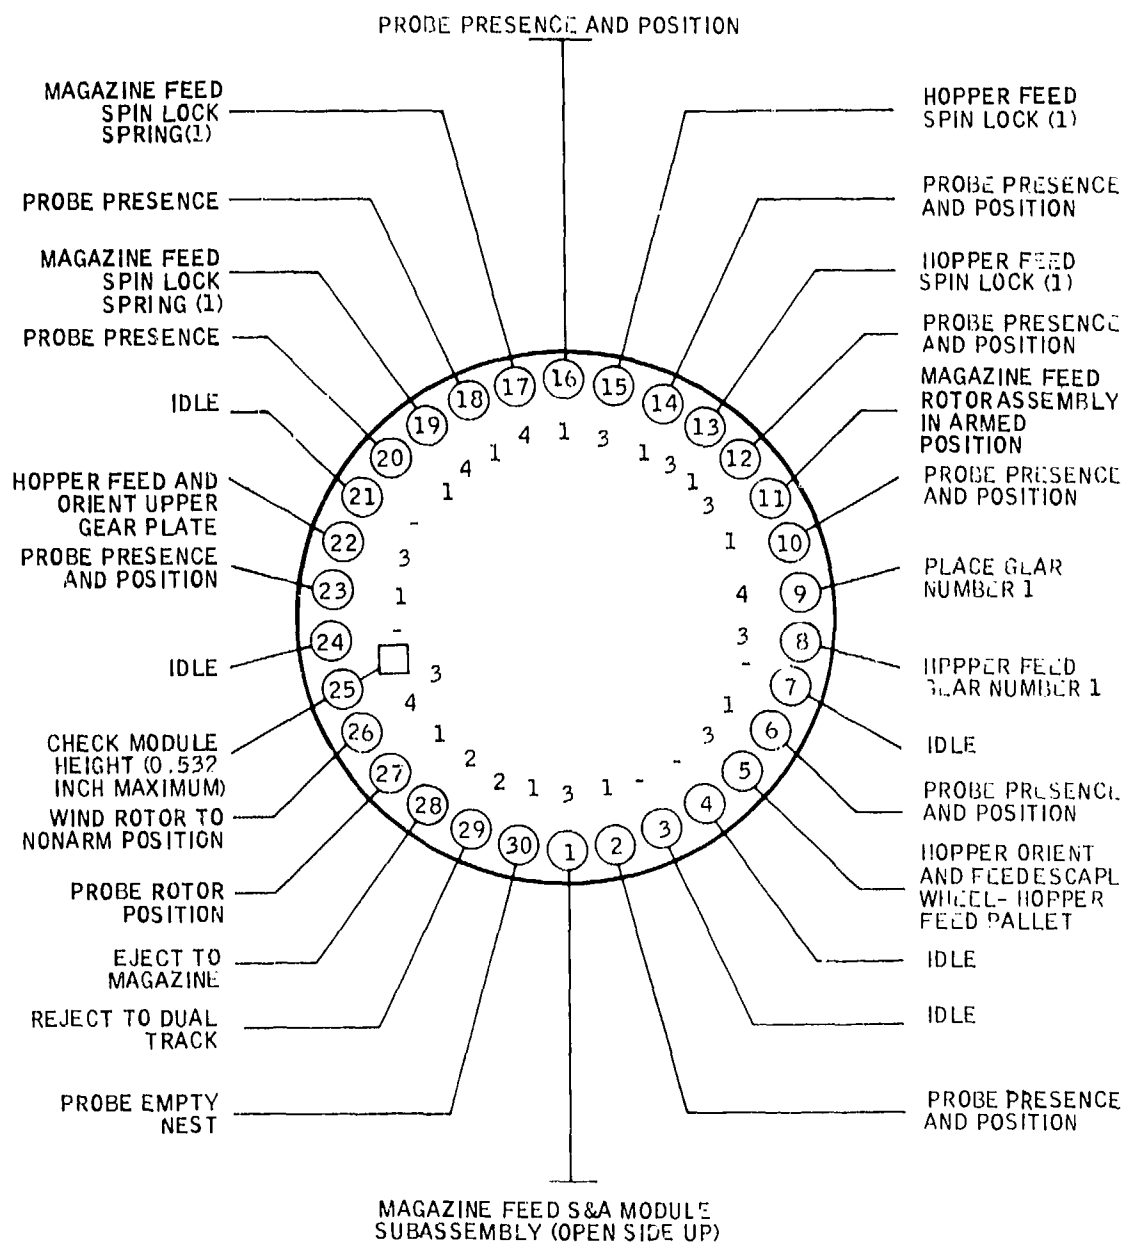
Dial schematic, machine S5 - S&A module subassembly operation 1 (gear train)
